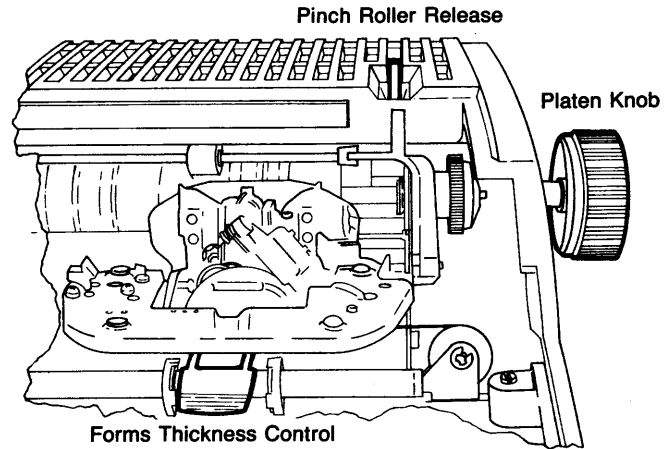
Front view without cover showing Platen Knob, Pinch Roller Release, and Forms Thickness Control.
